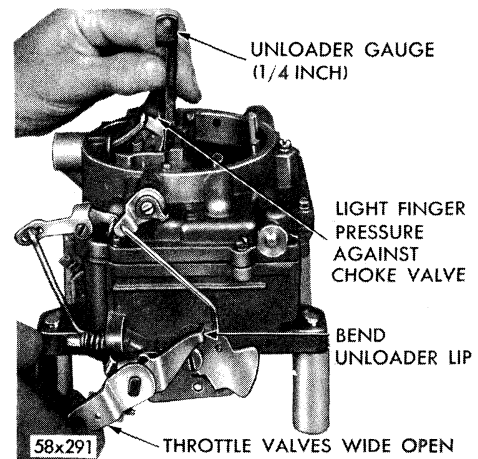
Checking Choke Unloader Adjustment (wide open kick)
